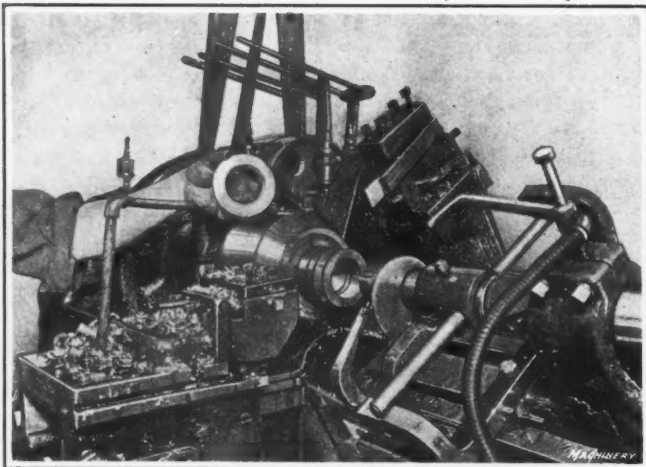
A Different Design of Tap Fixture from that shown in Fig. 29
